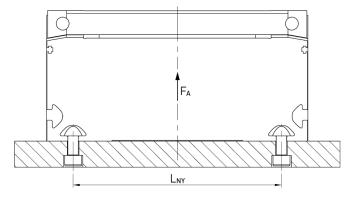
Hole spacing for fastening linear axes HT250L from below with T nuts
